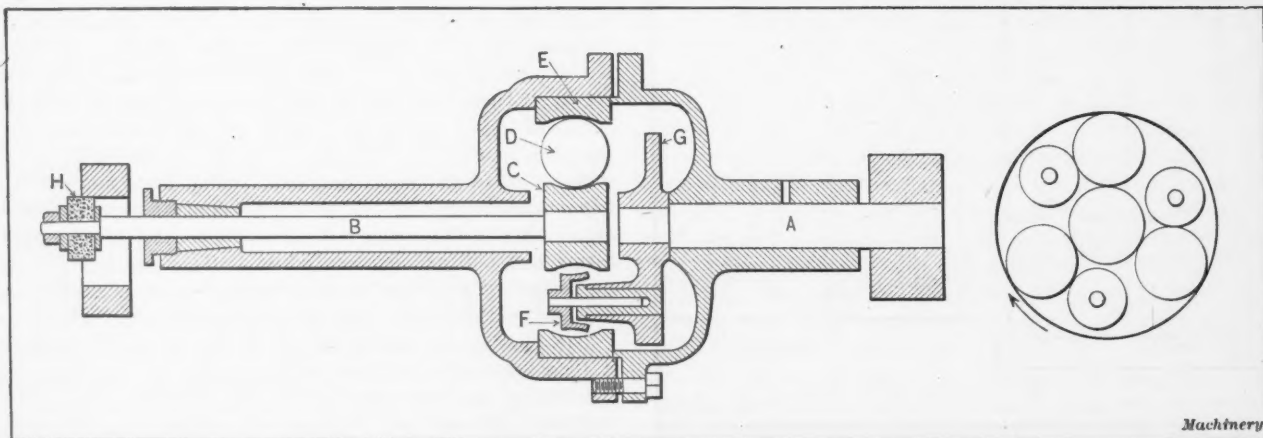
Sectional View, showing Construction of Grinder Spindle illustrated in Fig. 1
